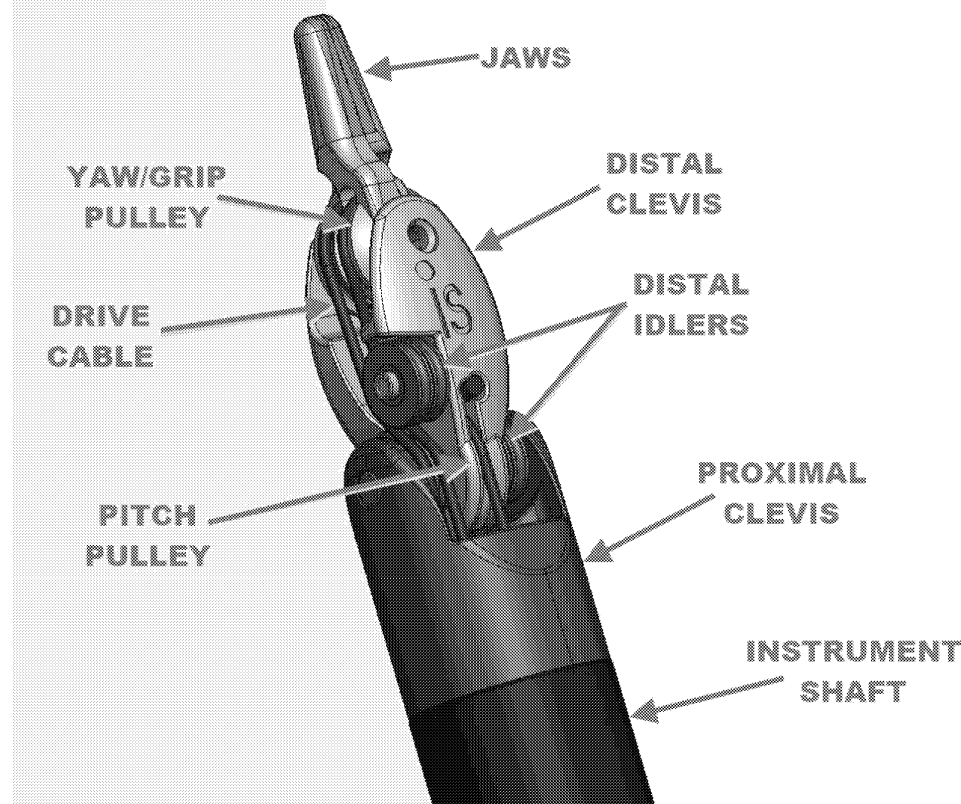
IS4000 Instrument Distal Assembly (Large Needle Driver Shown)
